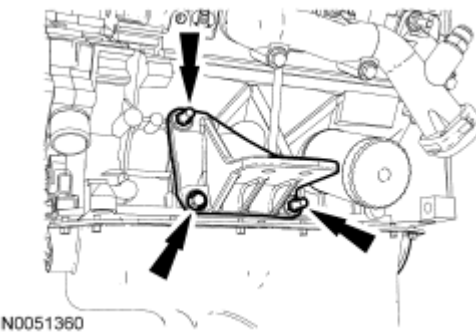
Locating Stud Bolts & LH Engine Support Insulator Bracket
